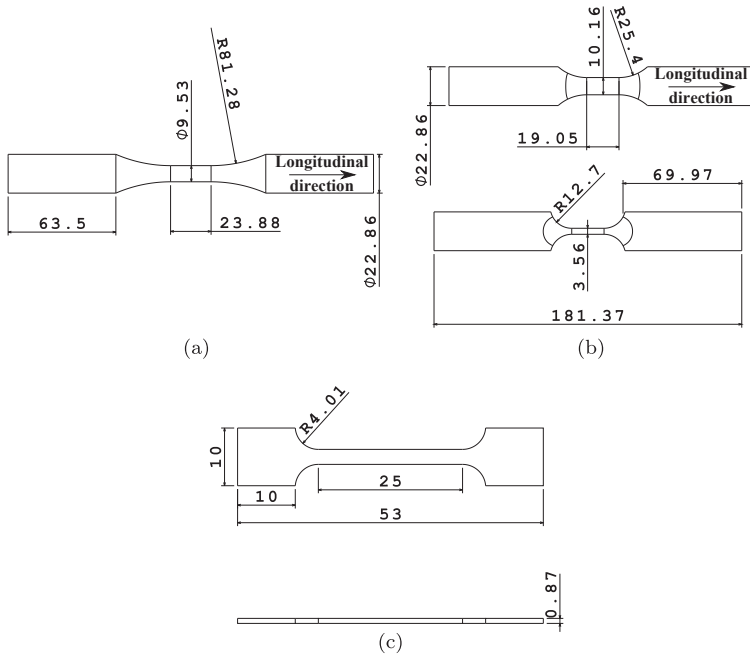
(a) Cylindrical and (b) rectangular specimens used for the fatigue tests and residual stresses relaxation measurements, respectively. (c) Micro-tensile specimen used for the X-ray elastic constant determination and the FWHM – ϵ_p relationship. Dimensions are in mm. The longitudinal direction is specified for the fatigue specimens.
